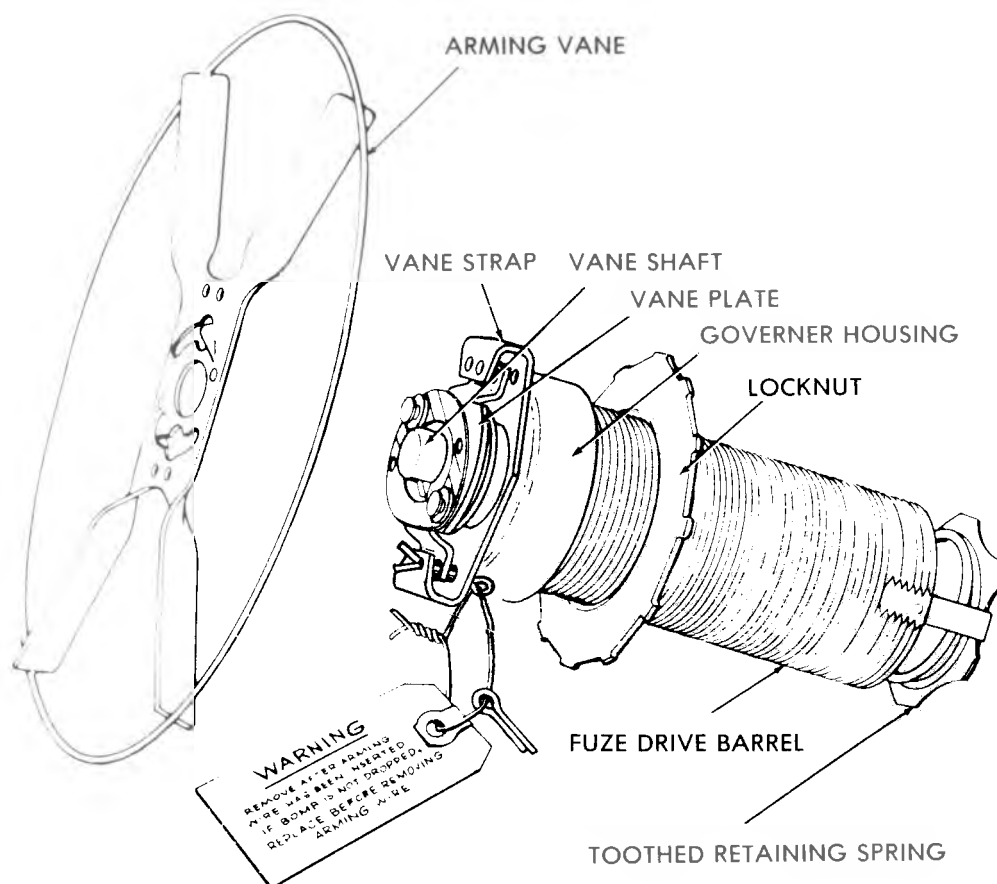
Fuze Drive MK 5, Mods 1 and 2 — Typical
